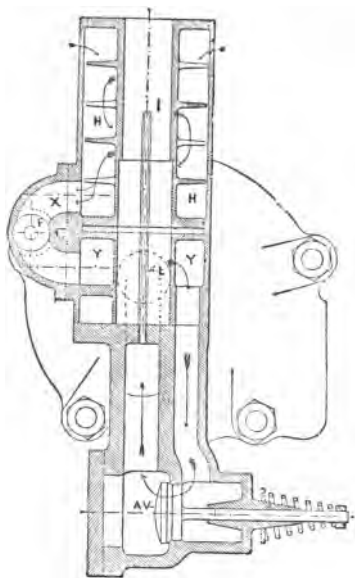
Section through the Vaporiser of the Britannia Oil Engine.
